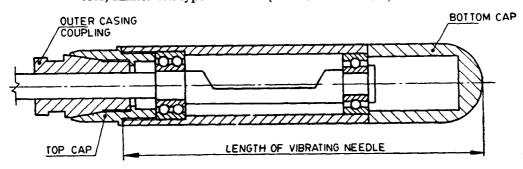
A TYPICAL VIBRATING NEEDLE WITH ECCENTRIC SHAFT
